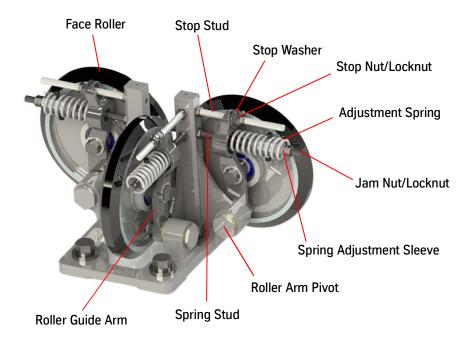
8" Roller Guide Assembly, 454ER and 454ET
